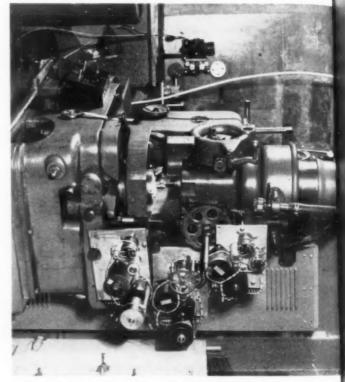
Servo-adapted gear shaper for cutting noncircular gears.
